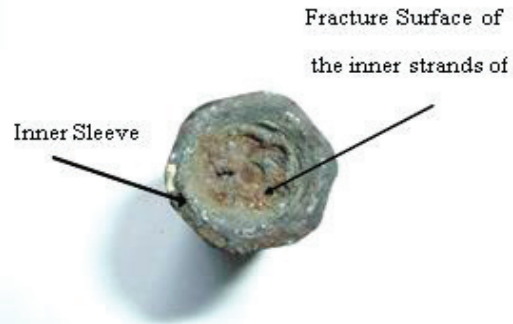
Fracture Surface of the Steel Strands of the Inner Sleeve, at the 1st Cut [1]
